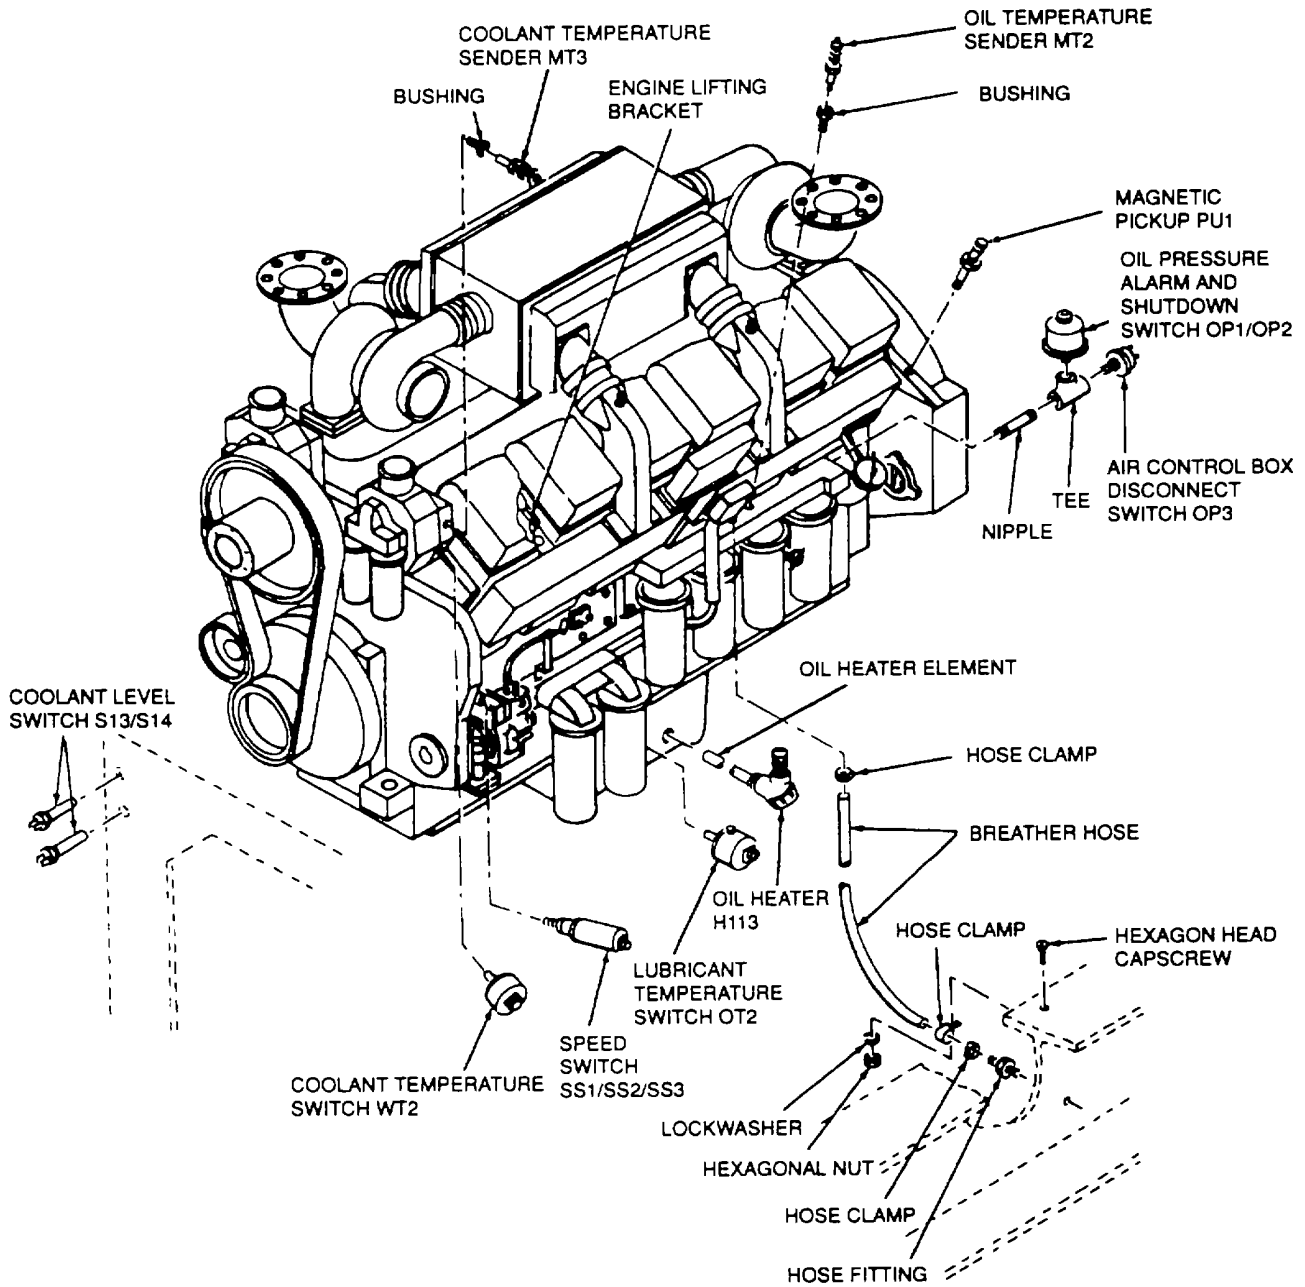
Engine and Related Parts (Sheet 3 of 5)
